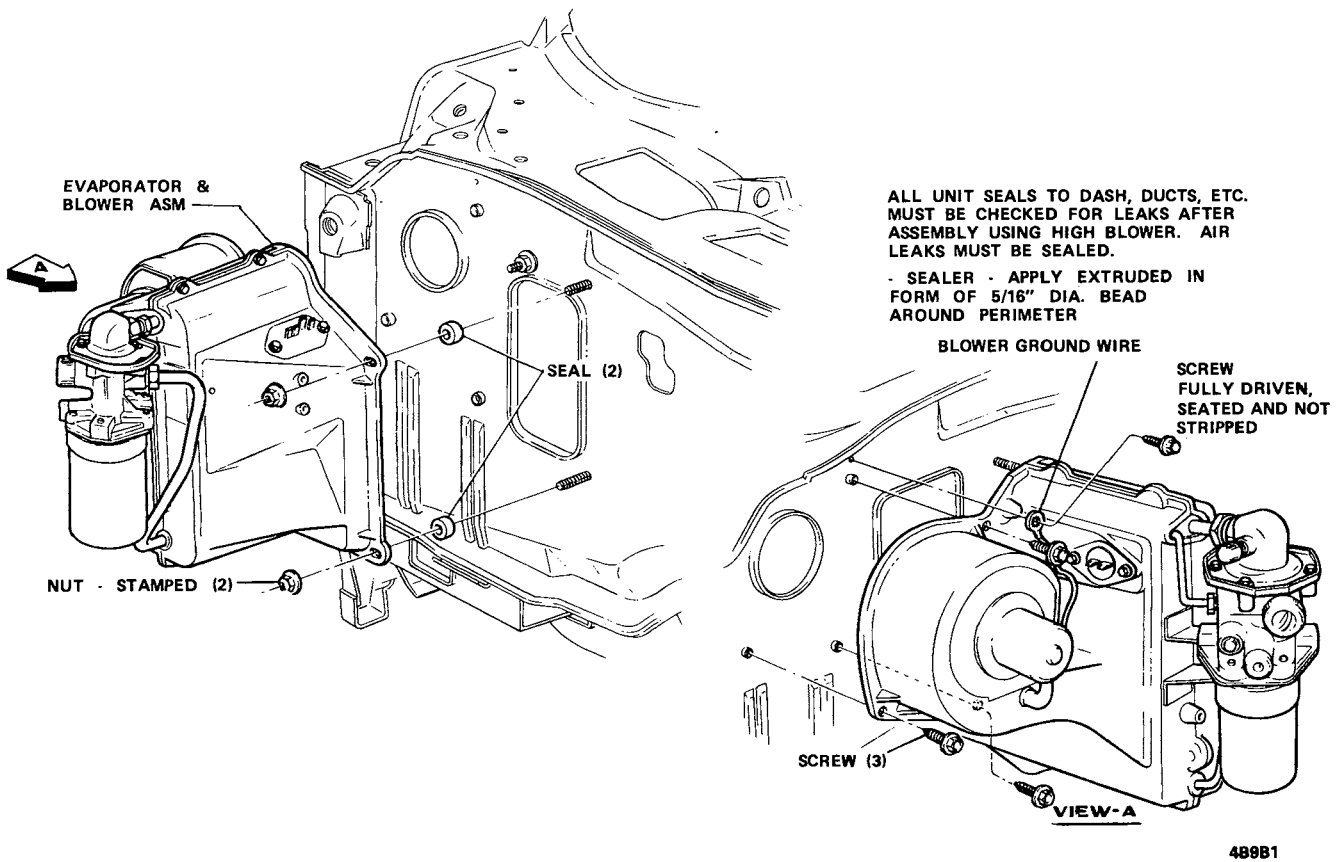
B-141 - Evaporator and Blower Assembly - A Series
